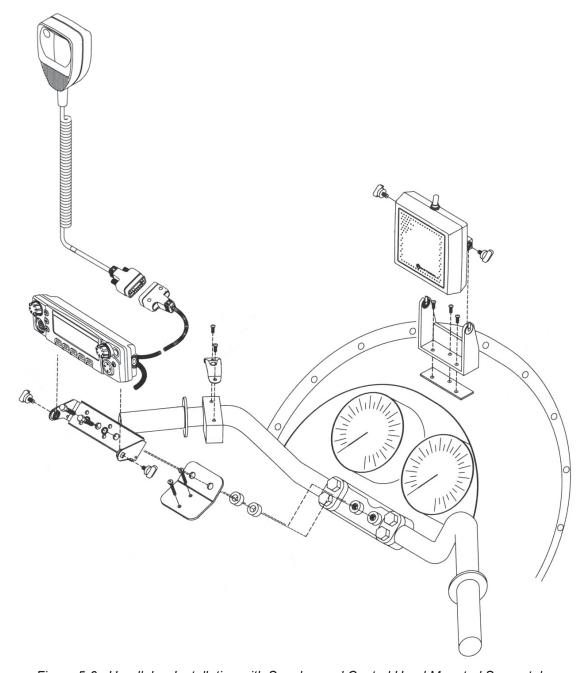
Handlebar Installation with Speaker and Control Head Mounted Separately
